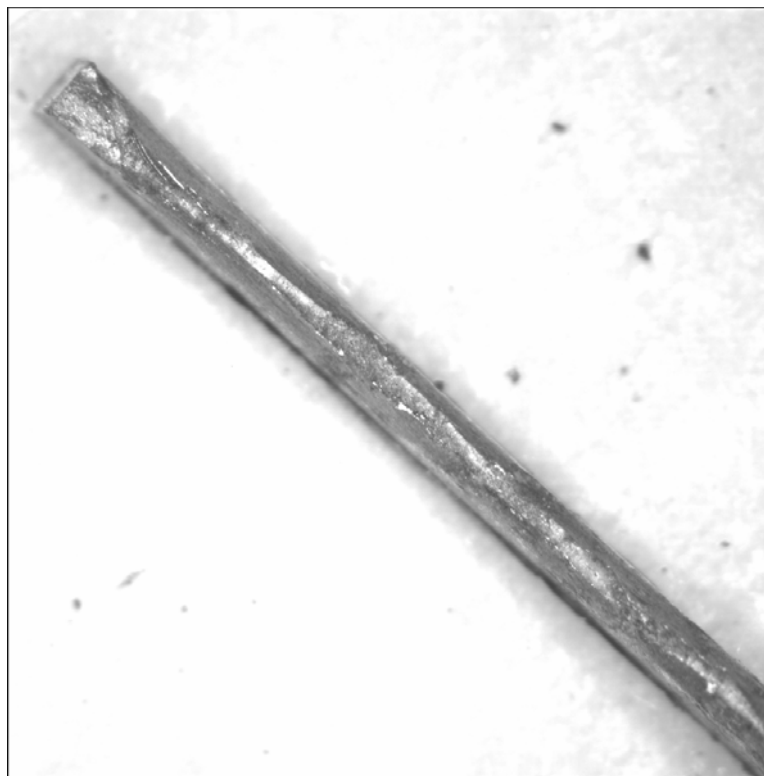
Fracture Surface from Specimen 5618.
